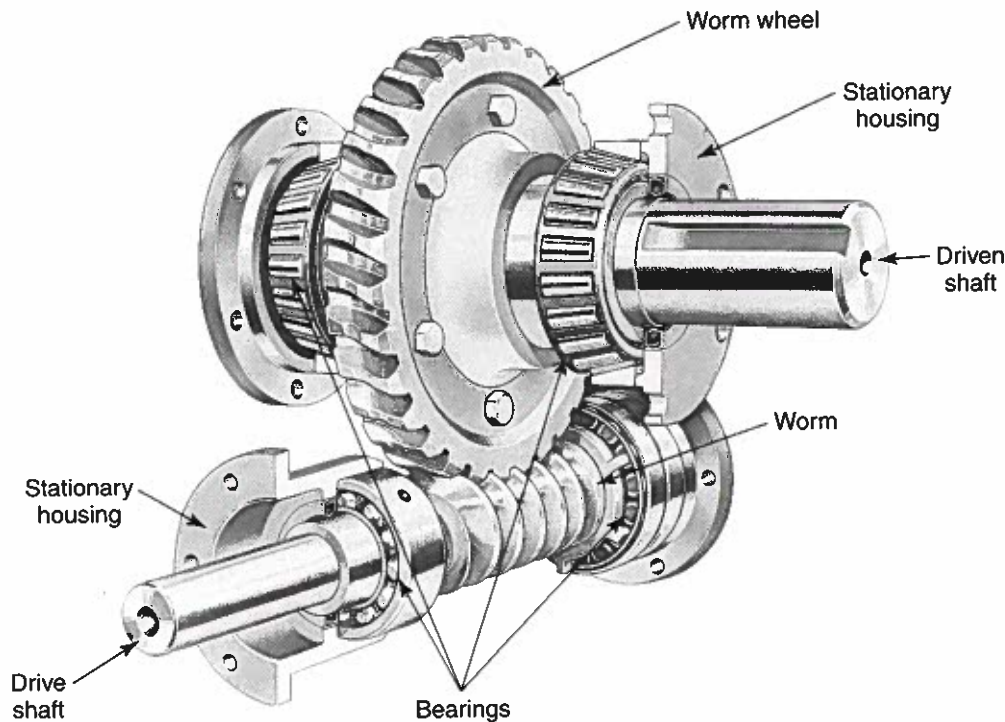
The shafts in this assembly are supported in their housings by bearings. The bearings reduce friction between the rotating and stationary parts. The worm gear, comprised of a worm and a worm wheel, transmits power between drive and driven shafts. (Cleveland Gear)
